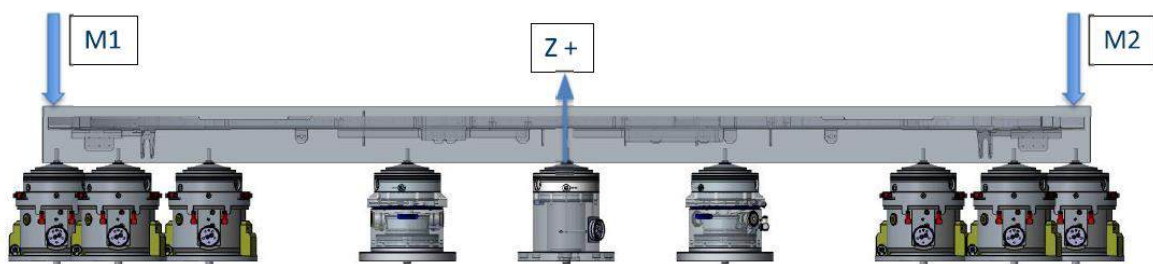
Scheme of mounting the element in a side view and measuring the height of the element on the machine tool - after the OP10 operation at points M1 and M2.
